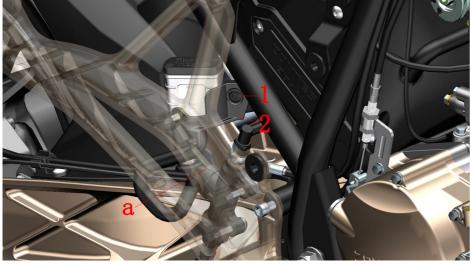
Rear wheel, swinging arm assembly		Rear disc brake main pump adding braking liquid	CHK	Q
